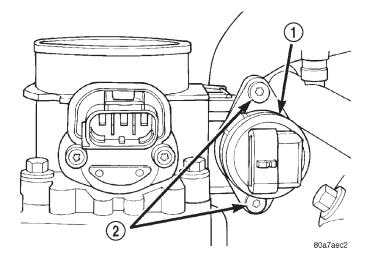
Mounting Bolts (Screws)—IAC Motor
